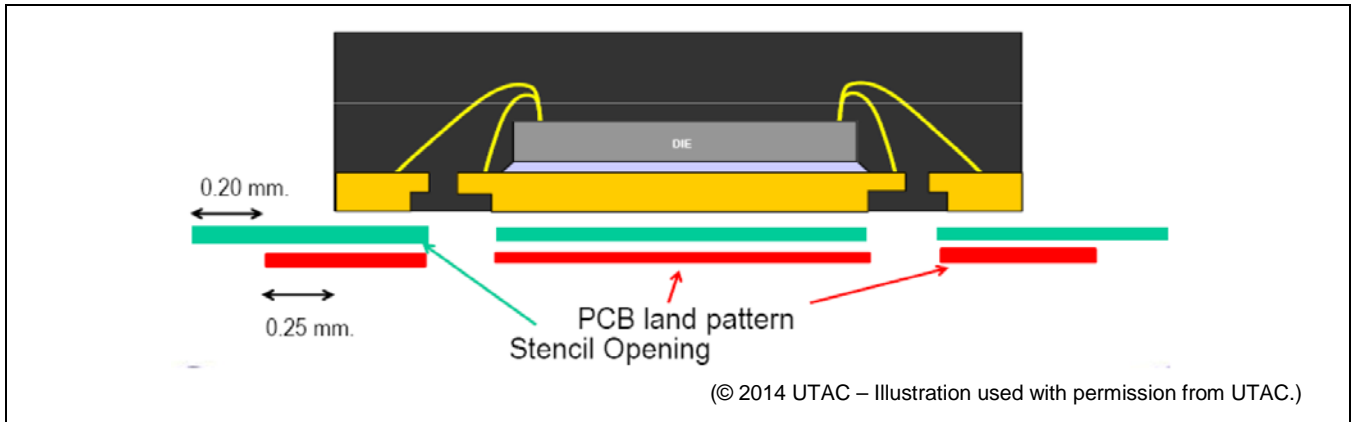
illustrates a suggested footprint for printed circuit board (PCB) designs using the ZSSC3170 DFN20.
